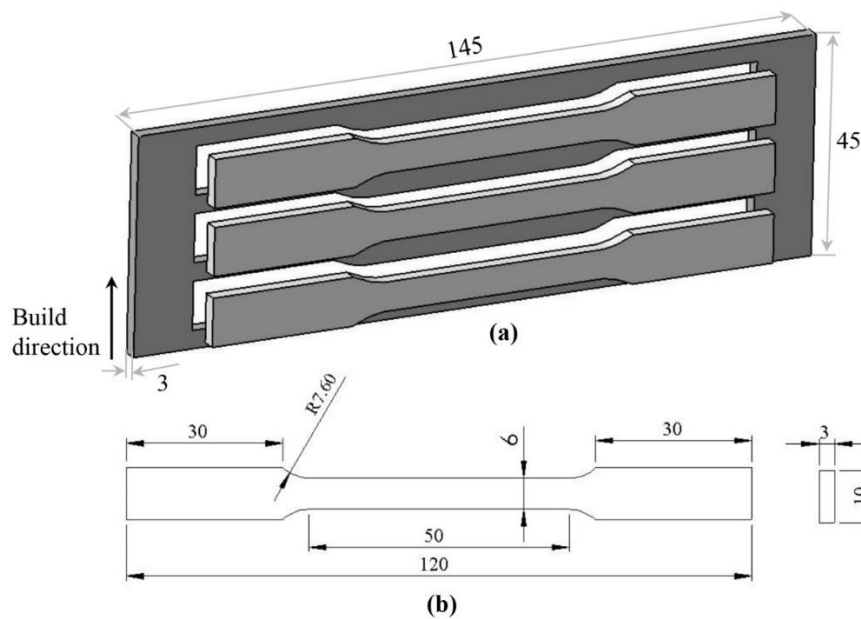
Schematic of (a) geometry and tensile test sample extraction (b) dimensions of flat tensile test specimen (unit: mm).
